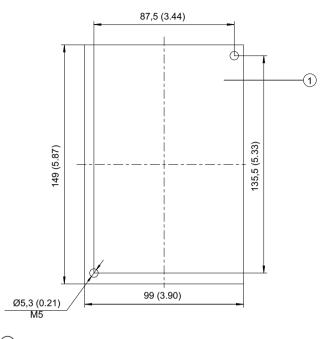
Dimension drawing of the DRIVE-CLiQ Hub Module External DME20, all data in mm and (inches)
